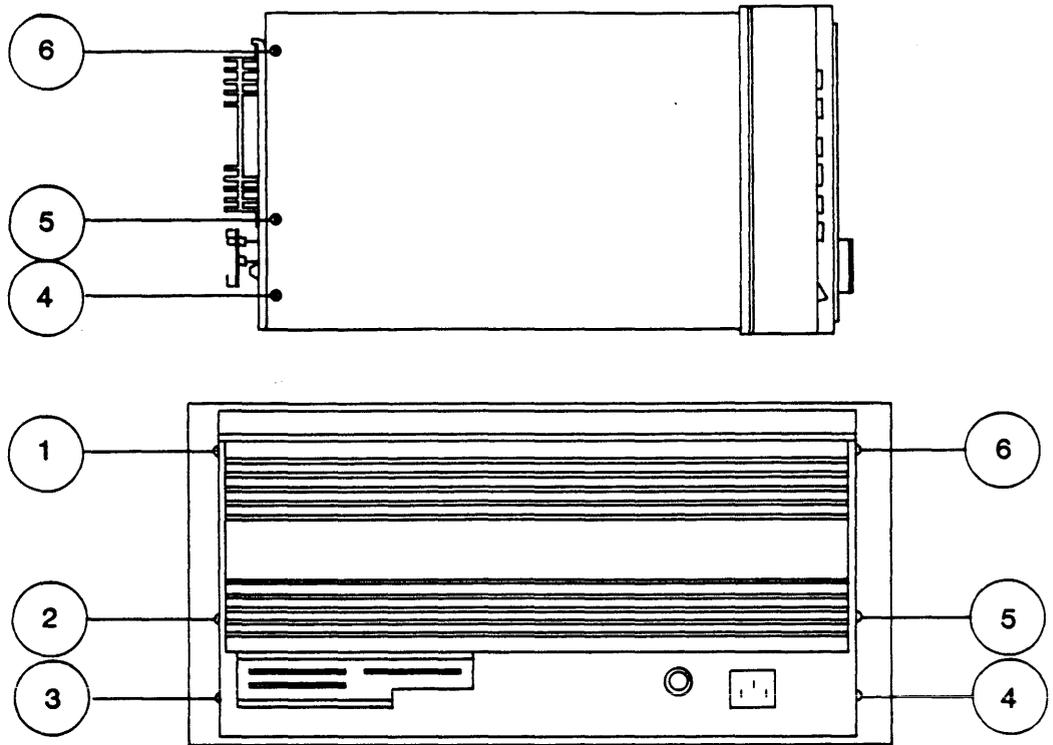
Model 9700/9800 Drive and Formatter Mounting Screws
